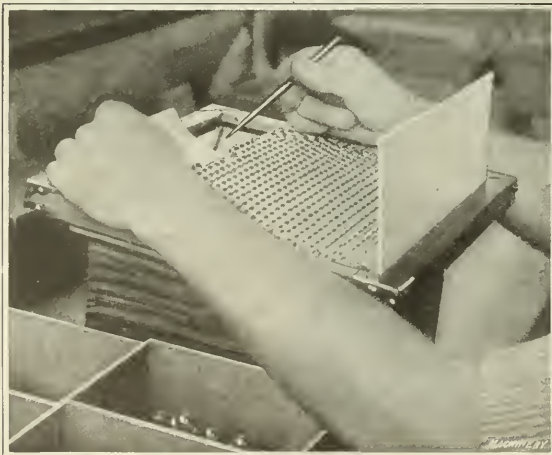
Type of Glass Plate on which Preliminary Inspection is conducted
